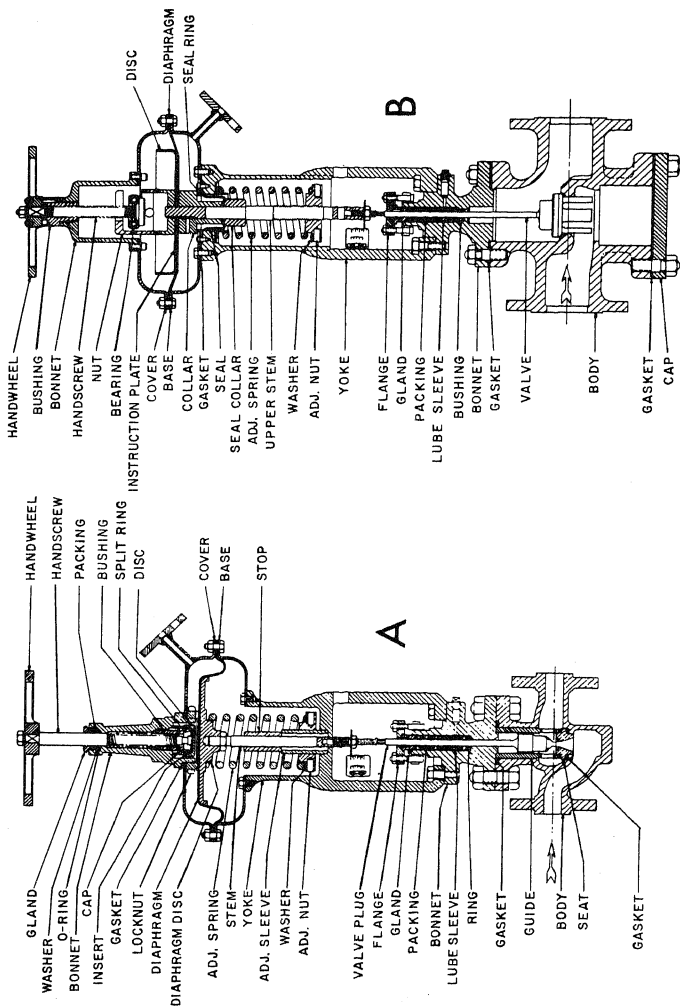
Gland sealing steam regulators. A. Gland sealing steam make-up valve with actuator. B. Gland sealing steam unloading valve with actuator.
